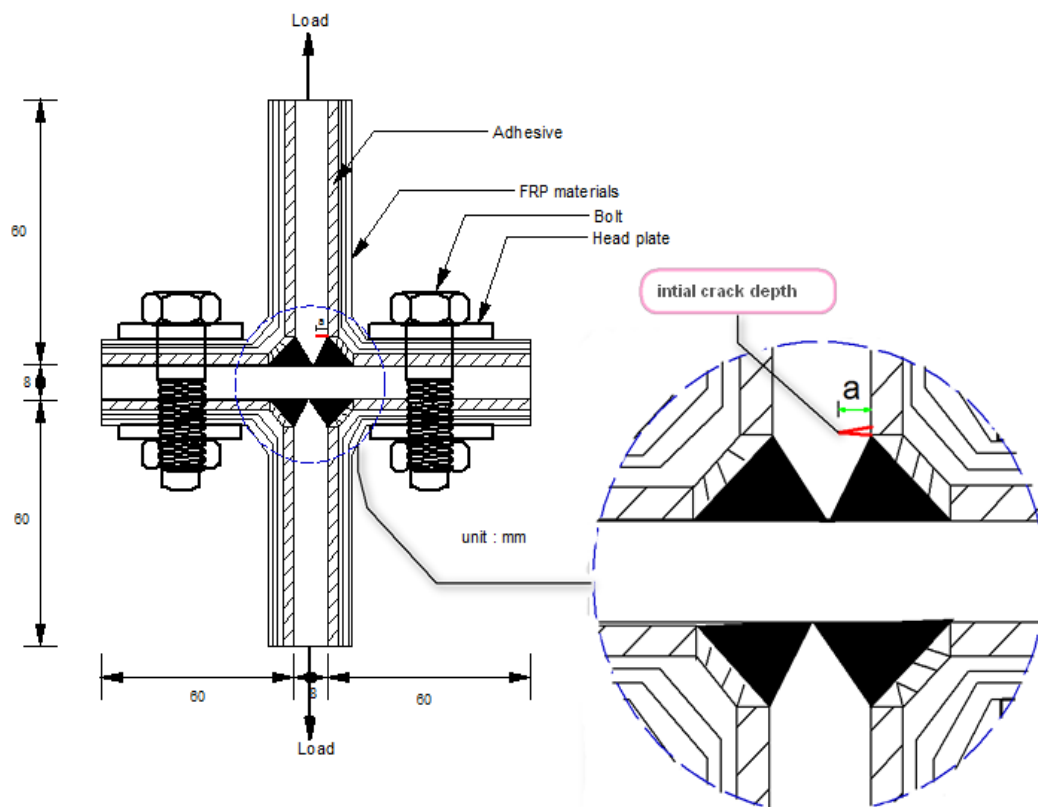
Load-carrying cruciform joint with a crack at weld toe
